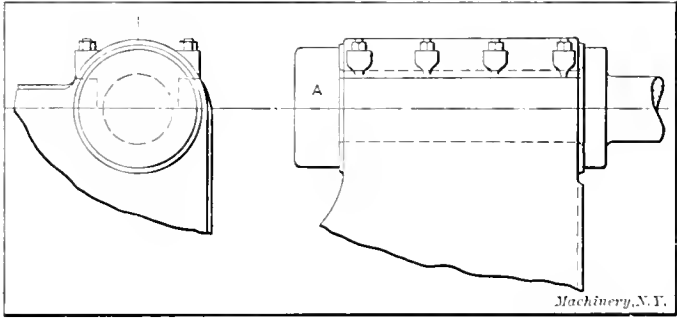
Usual Method of making Crosshead and Tie-rod for Hydraulic Press
